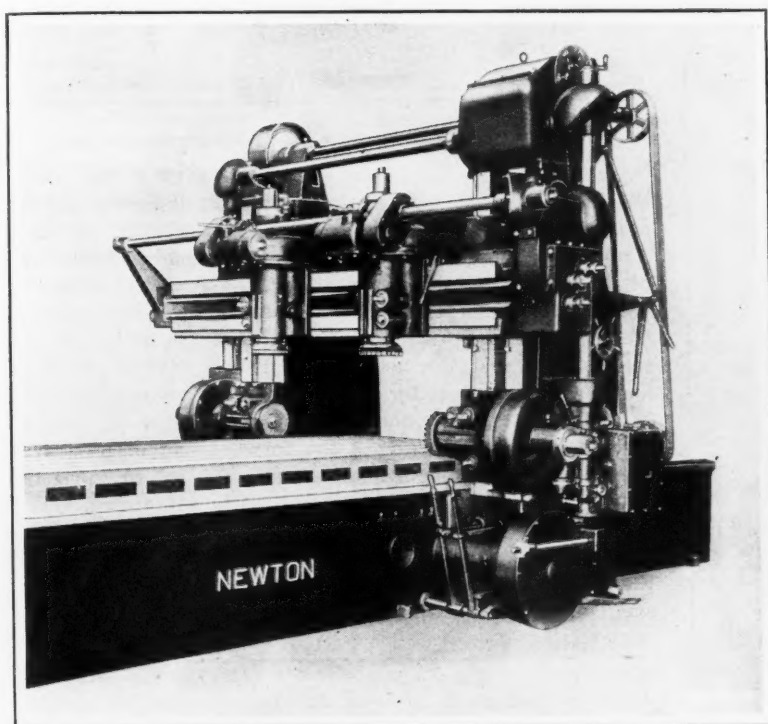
Newton Planer-type Milling Machine with Four Heads
